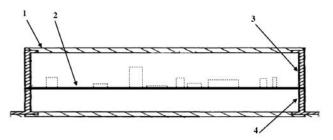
Sketch (physical model) of one of the units on-board electronic device; 1 – block body; 2 – printed circuit board with electronic components (their dimensions are shown in dotted line); 3, 4 – the upper and the lower parts of the side wall of the body
